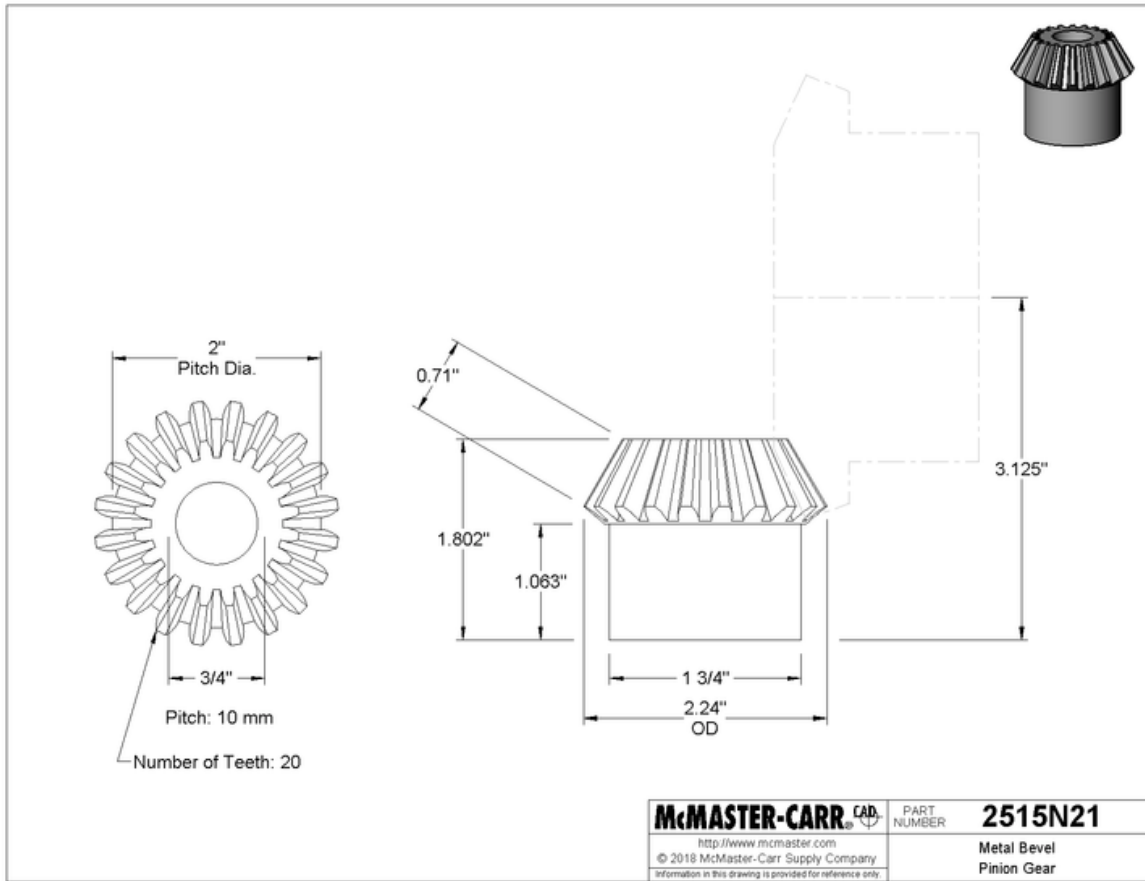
Bevel Pinion Gear Engineering Drawing [28]
